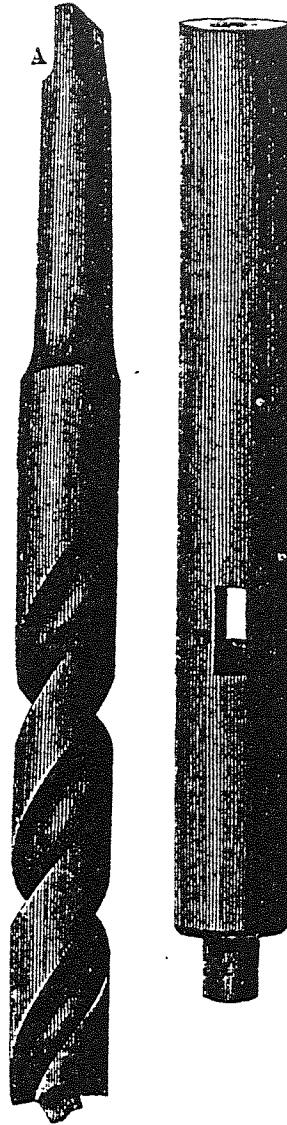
THE STANDARD TWIST DRILL AND SOCKET ADAPTOR -1865
